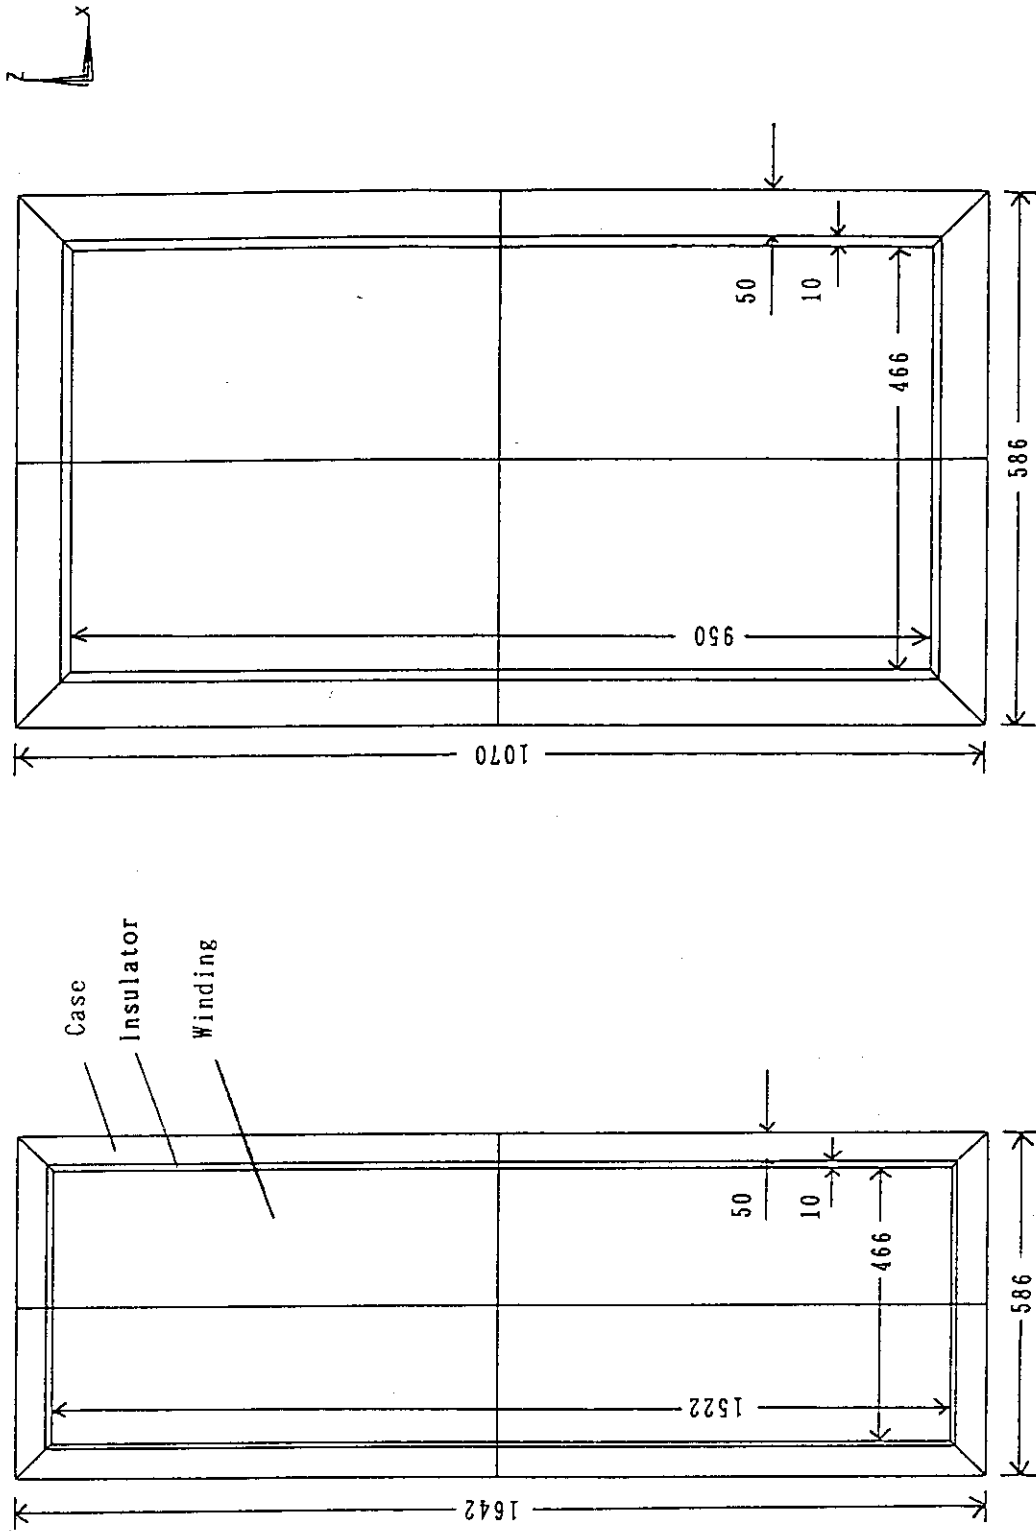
(a) Dimensions of the PF-6 coil. (b) Dimensions of the PF-7 coil.
